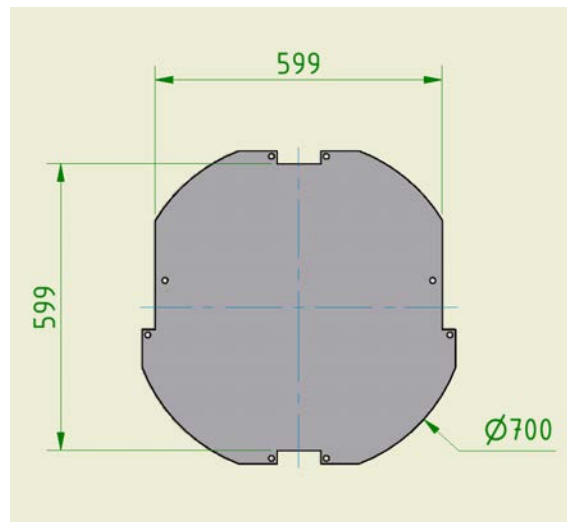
Drawing of a capsule platform with its dimensions and surface area which can be modified for mounting payloads. Its aluminum / plywood / aluminum compound structure allows thru-holes and thread holes.
